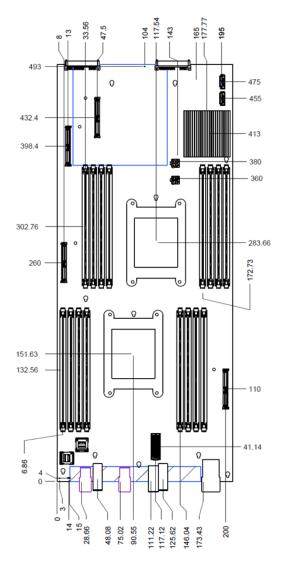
provides guidelines for mounting holes; actual mounting hole locations may vary to meet PCB implementation requirements.
